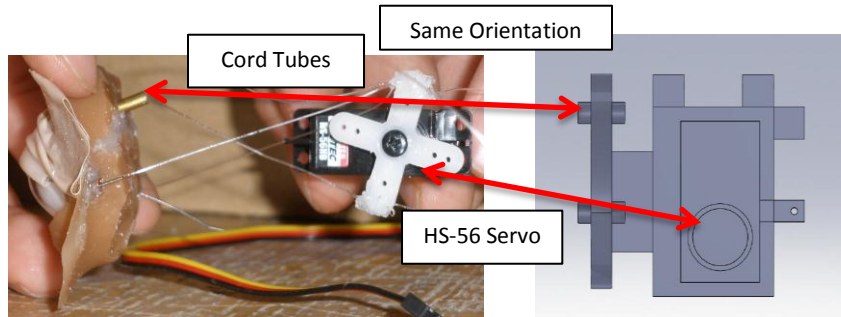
Right: Blinking mechanism w/out motor box. Left: Blinking mechanism motor box w/servo but w/out silicone bonded around front piece.
